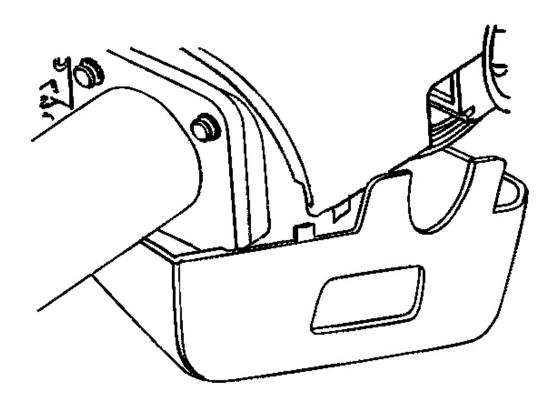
View Of Lower Trim Cover At Upper Trim Cover Courtesy of GENERAL MOTORS CORP.
